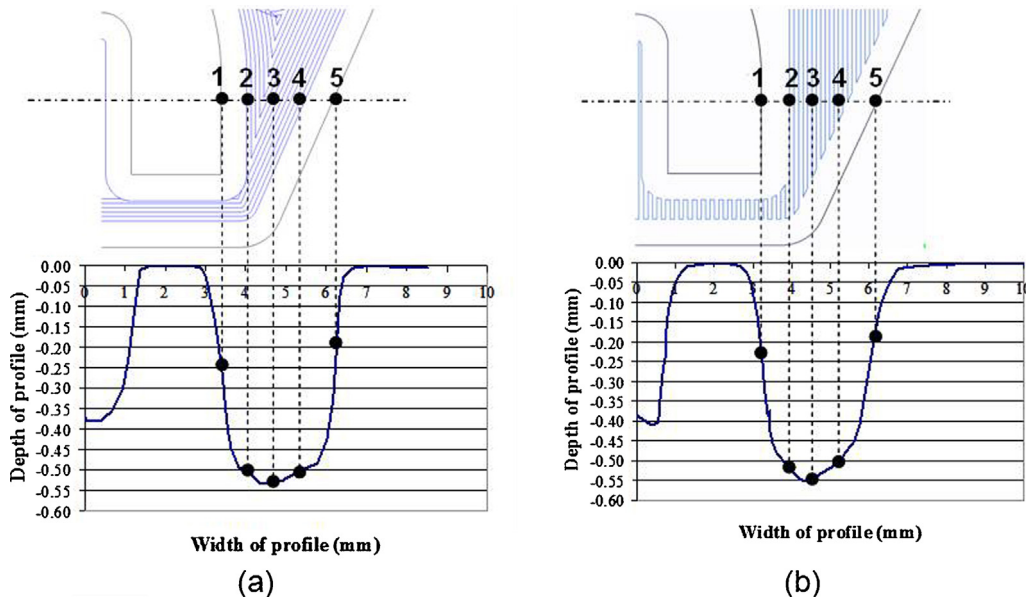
Cross-section of the profile machined using (a) contour-parallel and (b) zig-zag tool paths.
